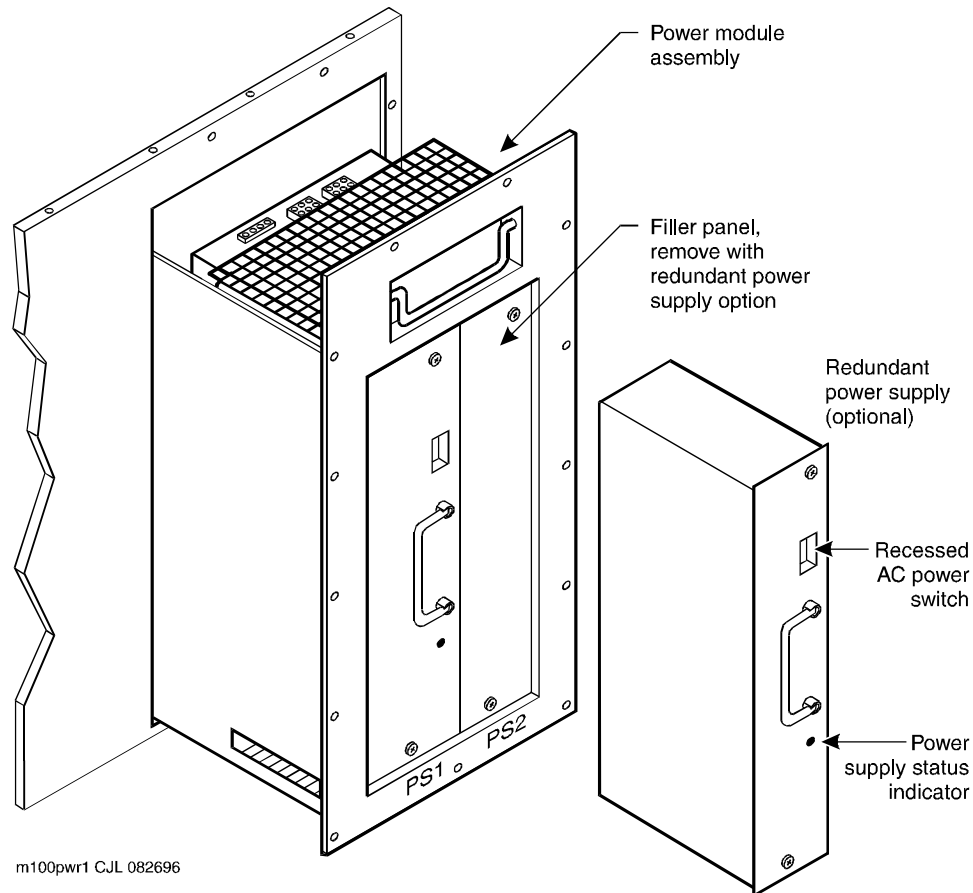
Power Module Assembly with Redundant Power Supply Capability
